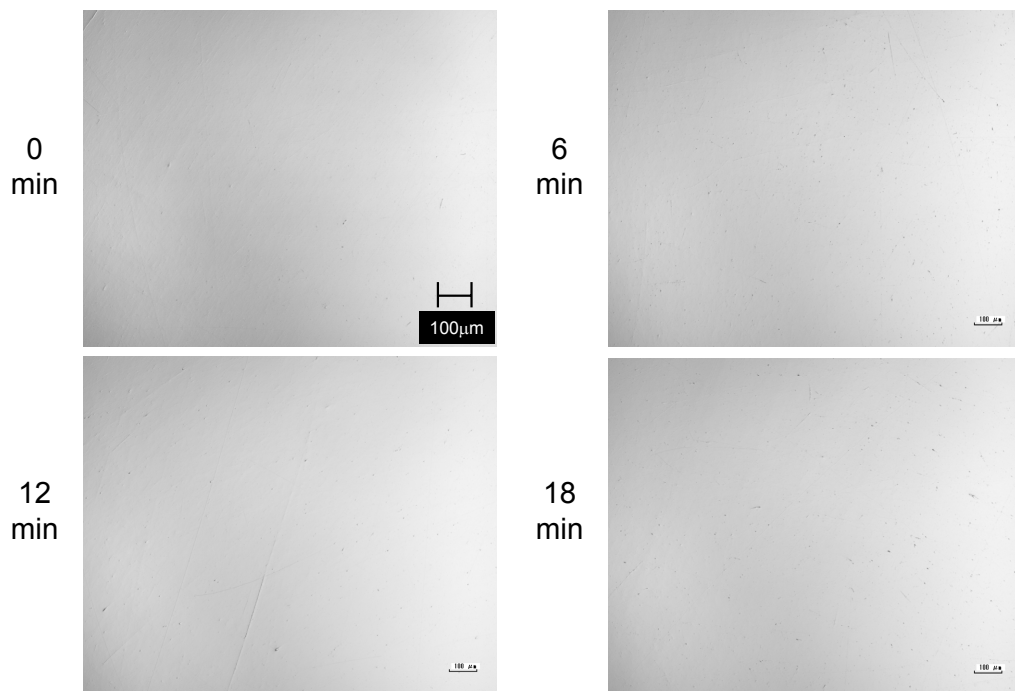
Surface of workpiece at the peripheral part ( # 8000 )
